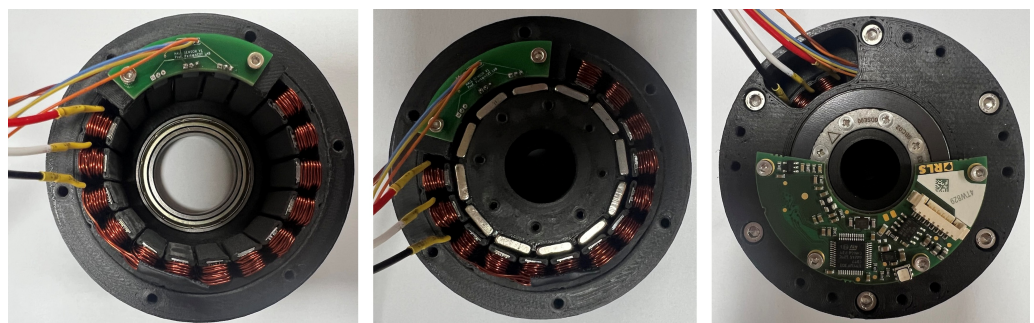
Stepwise assembly process of the 3D-printed BLDC motor: (left) stator inserted into the housing body, (center) rotor placed at the central axis, and (right) completed assembly with absolute encoder.
